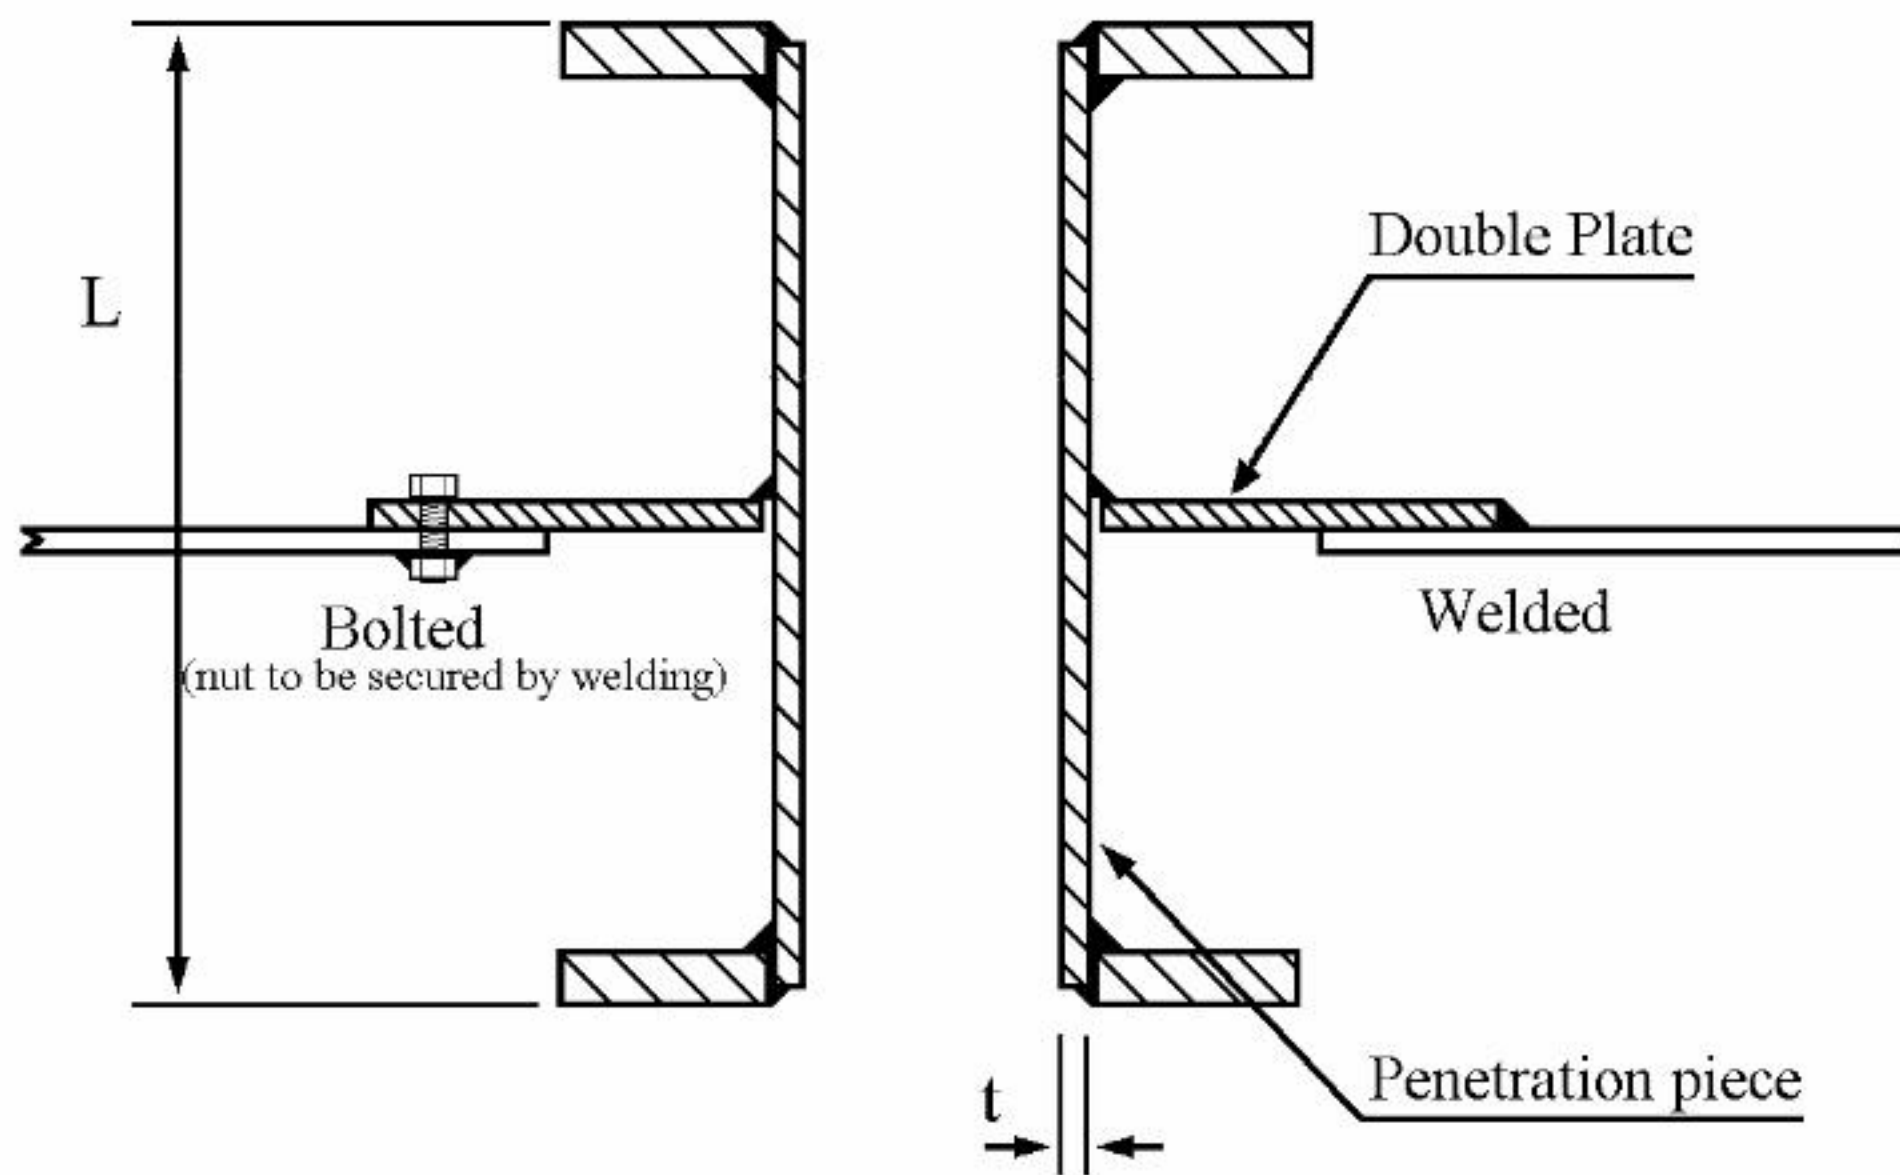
, Penetration through class A divisions with double plate and penetration piece with flange, bolted alternative indicated on the left side and welded alternative on the right side.
